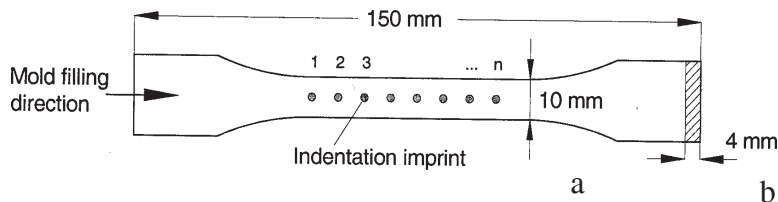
Geometry of the injection molding specimen (a) and cylindrical indentation set-up (b)
